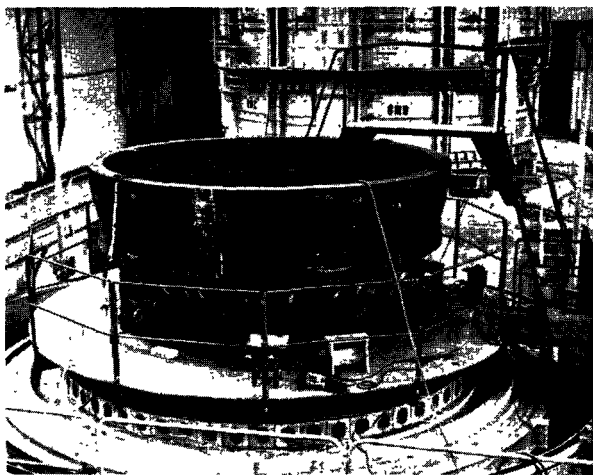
Location of welding parts on the bottom of electric resistance furnace
